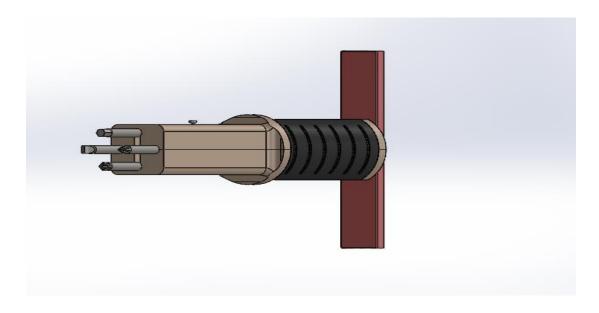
ISOMETRIC VIEW OF MULTIBIT SCREW DRIVER
